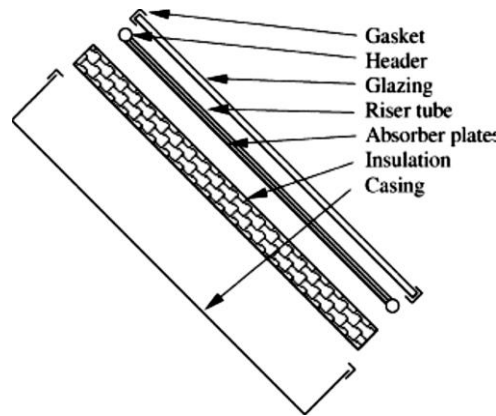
Flat Plate Collector Exploded View (Sabonnadiere, 2009)
